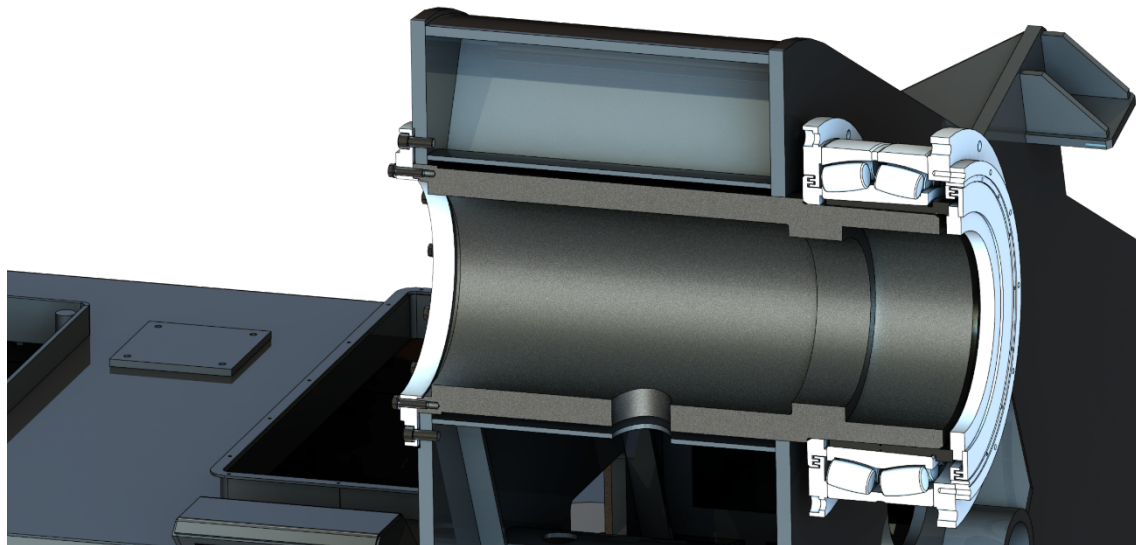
Elevation Bearing Assembly (Cross Section, Left Side)
